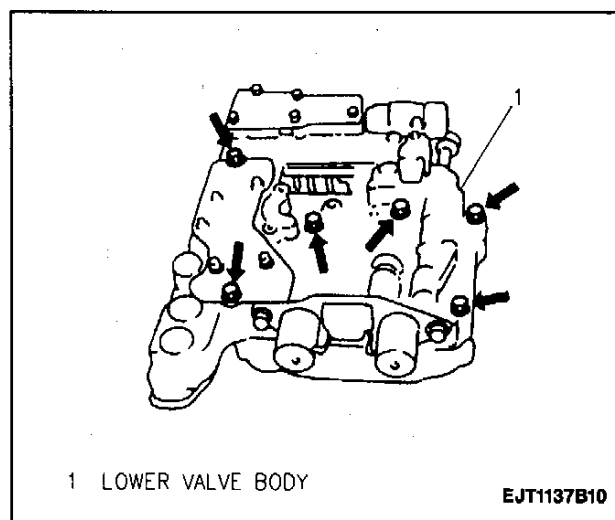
Lower Valve Body Bolt Location (03-72LE, 4-Speed)
